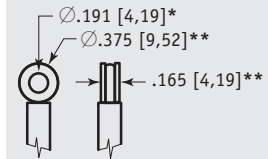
Outline Drawing (18 oz. cable tension only)
